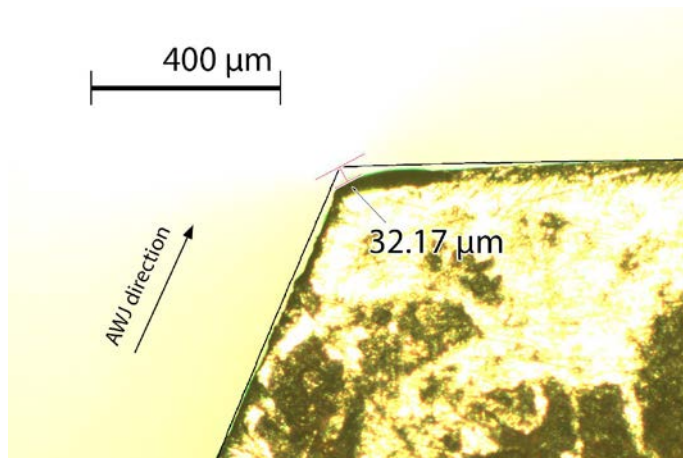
Figure N. Bottom geometry, feed rate 36 mm/s, tooth left side, gear B
